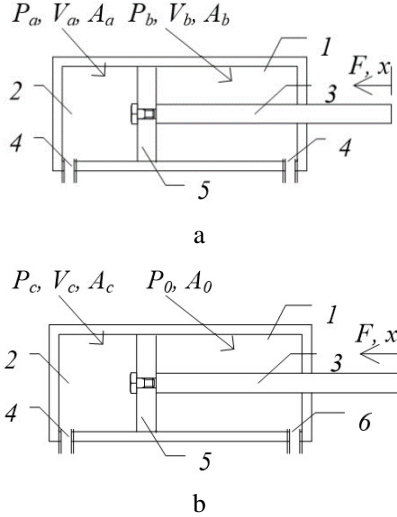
Chamber spring: 1 - The upper air chamber, 2 - the lower air chamber, 3 - piston rod, 4 - air valve, 5 - piston, 6 - air vent
